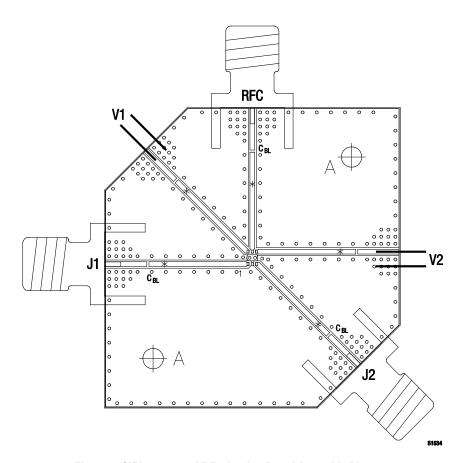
SKY13319-374LF Evaluation Board Assembly Diagram
